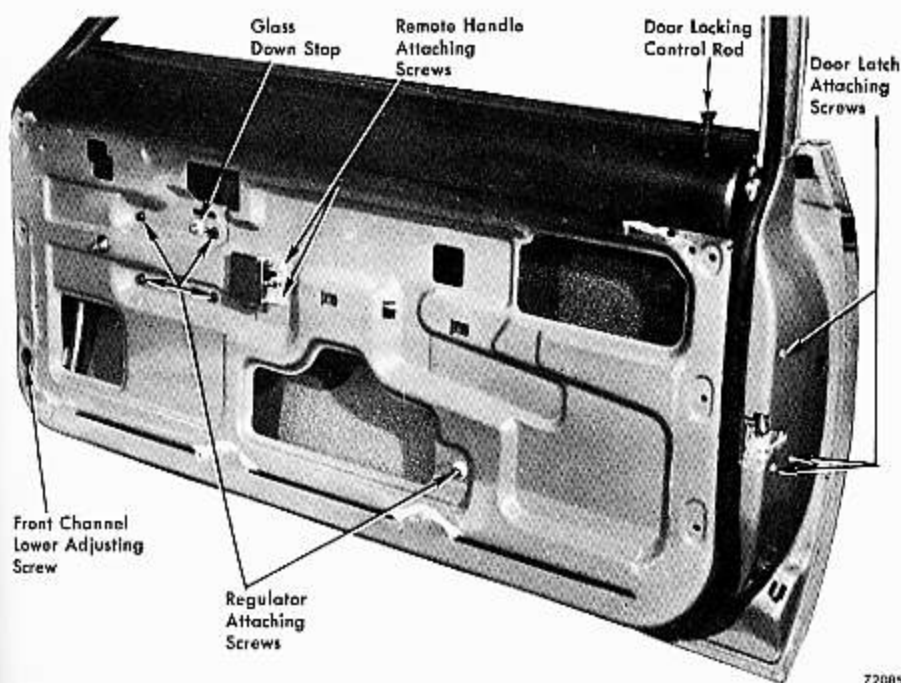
Front Door Latch, Window Regulator and Remote Control Attachment — 01-40 Series
